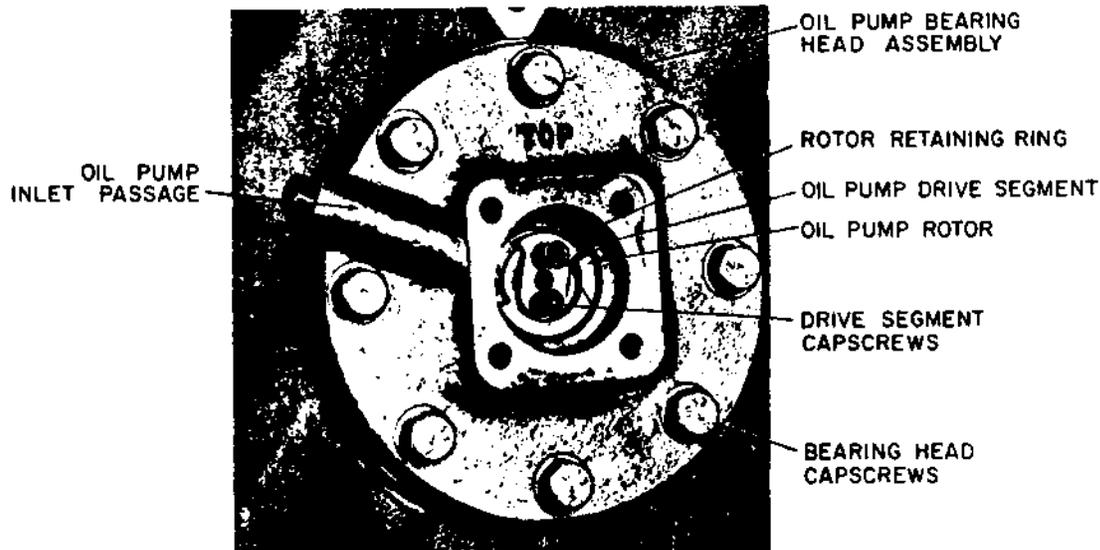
Bearing Head with Oil Pump Cover Removed
